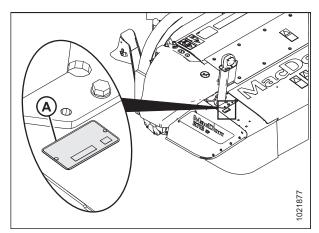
Right Side of Header – R113 SP Shown, R116 SP Similar
